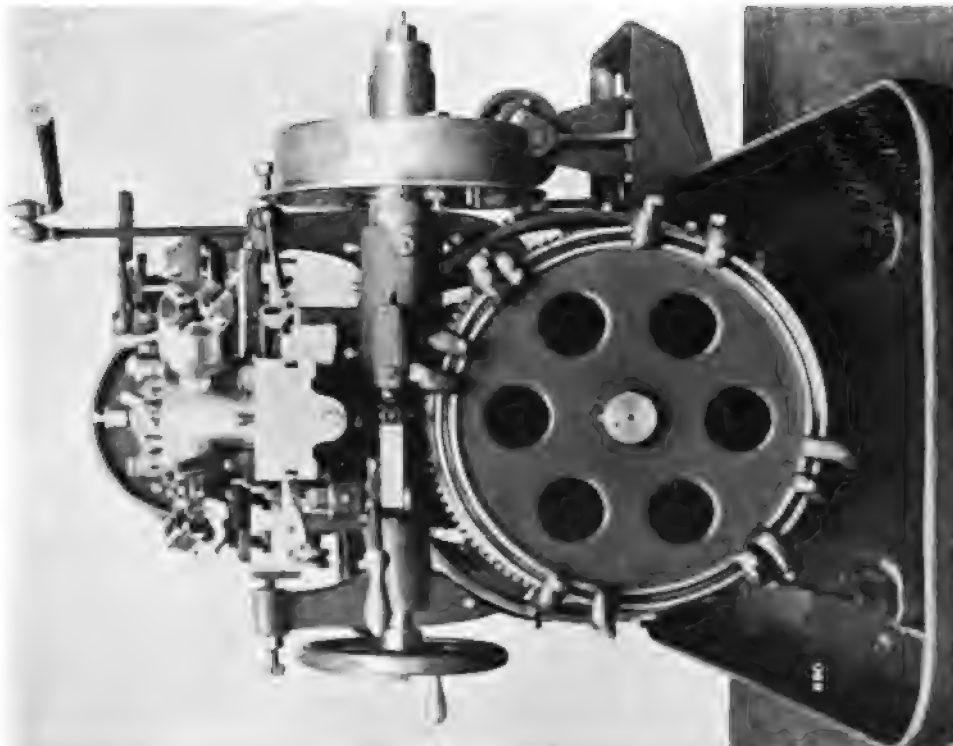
END VIEW OF AUTOMATIC SCREW MACHINE.
